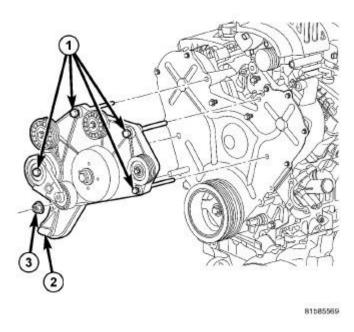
Accessory Drive Bracket & Fasteners Courtesy of CHRYSLER LLC
